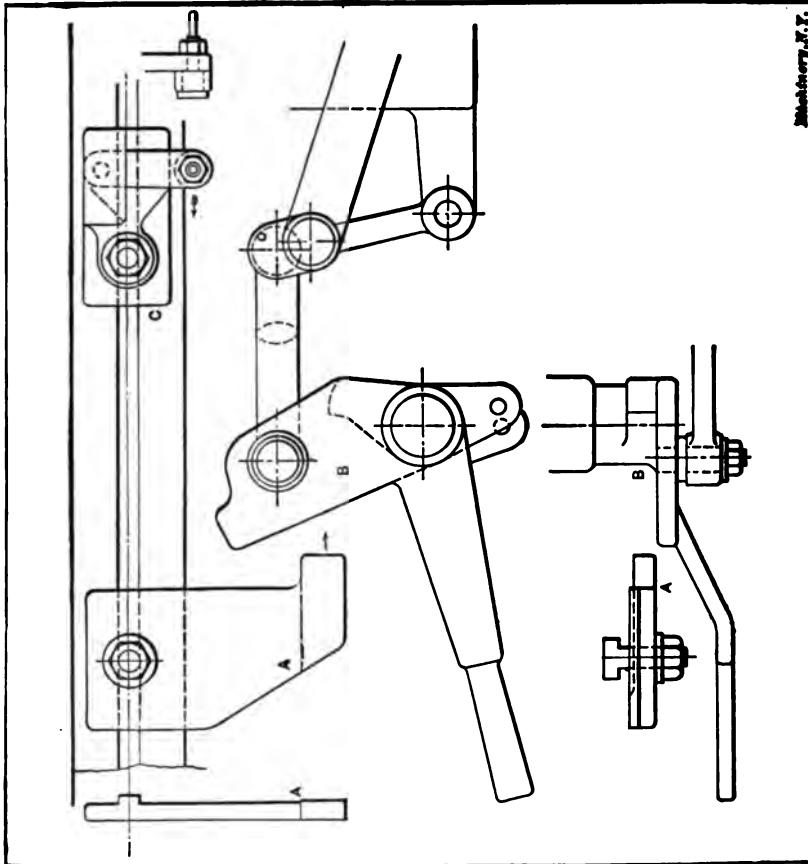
Trip Rod Fitted to Drill Press Sleeve
